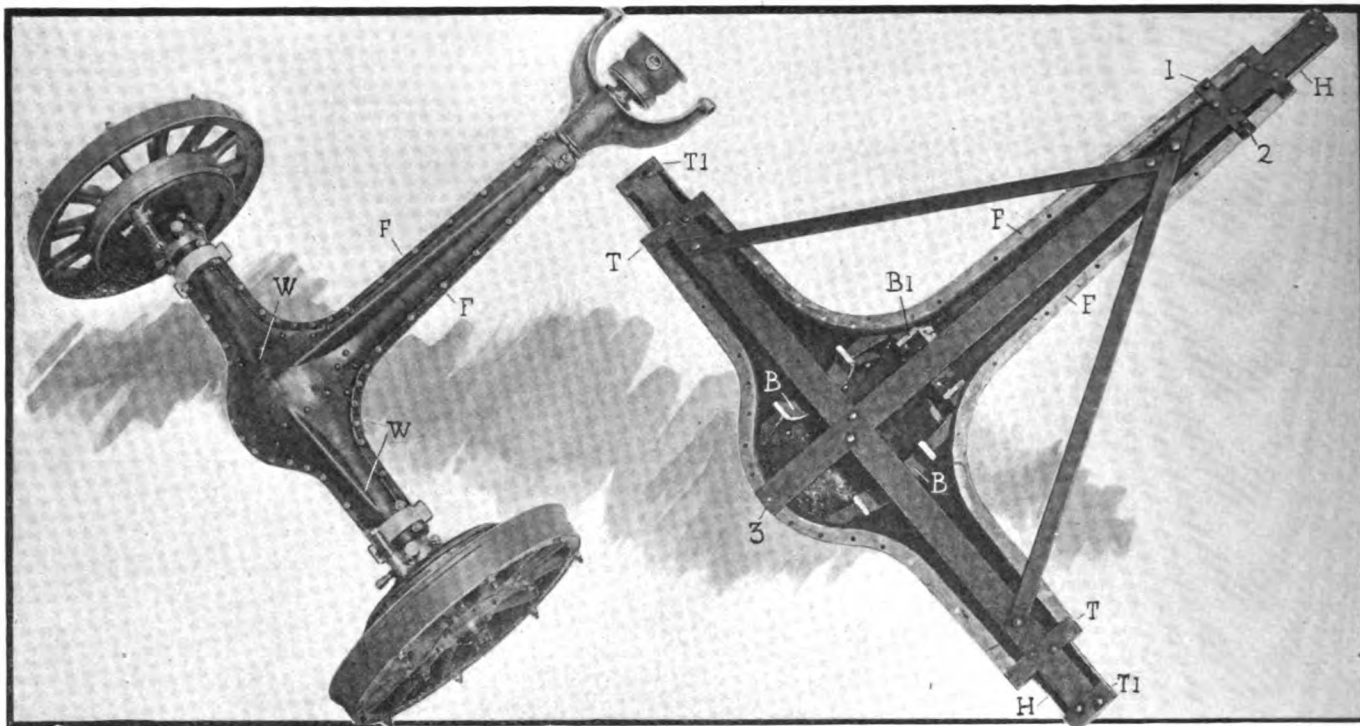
Flat pressed steel rear axle and combined torque tube.
